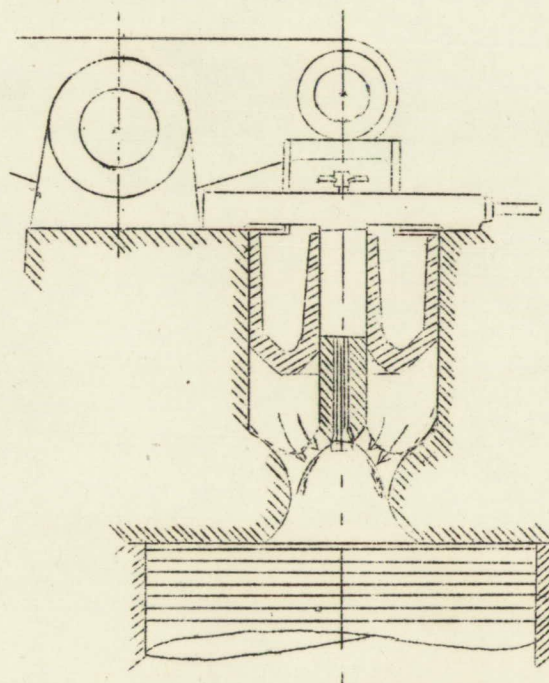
Auxiliary piston for forcing combustion air through the injected fuel sprays.
